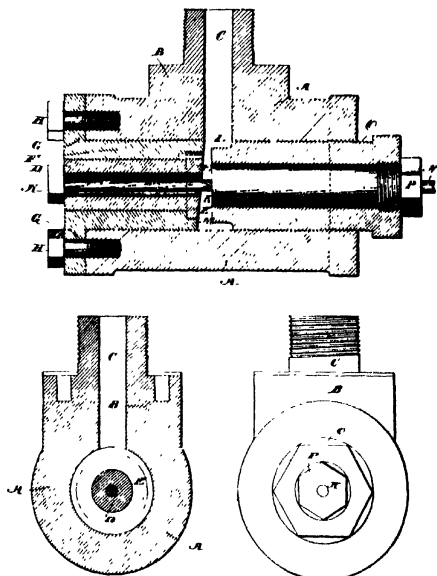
The Edson Nozzle for Making Celluloid Rods and Tubes.
